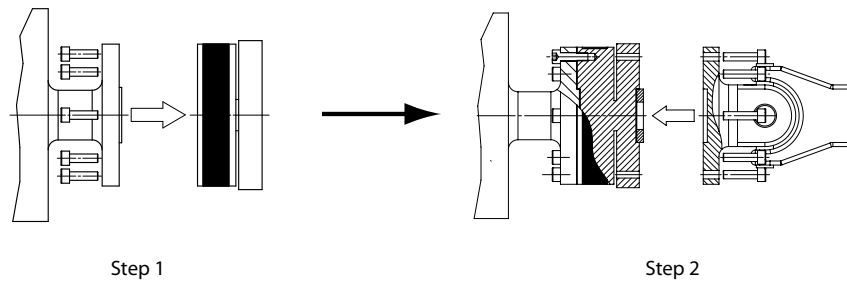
Mounting of TF 209 to TF 212 and TF 220 Sensors
